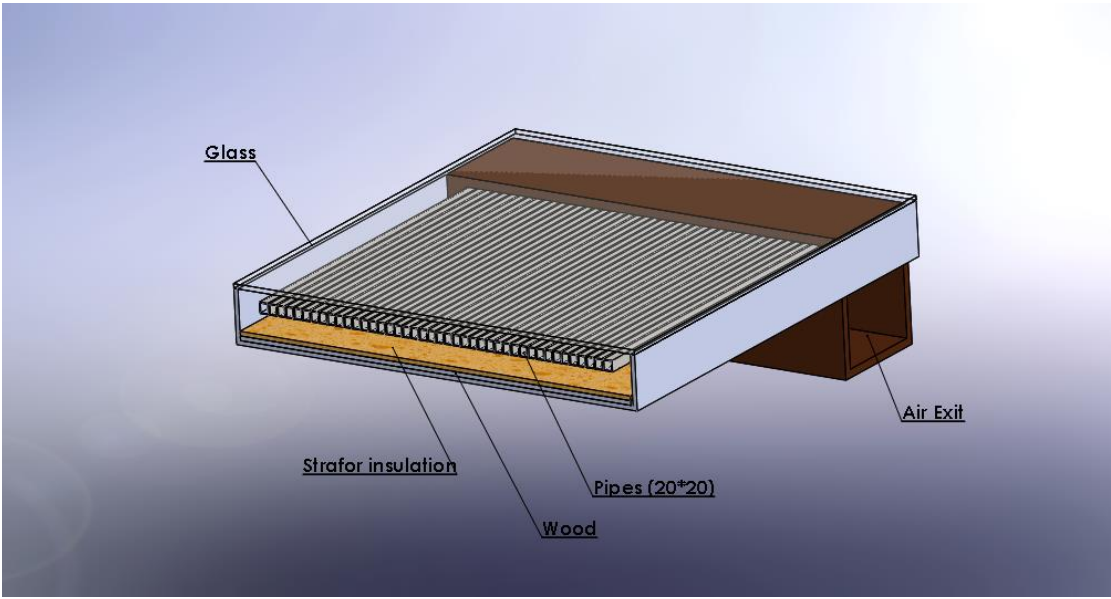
Sectional view of the (20 x 20 mm) Aluminum tubes.
